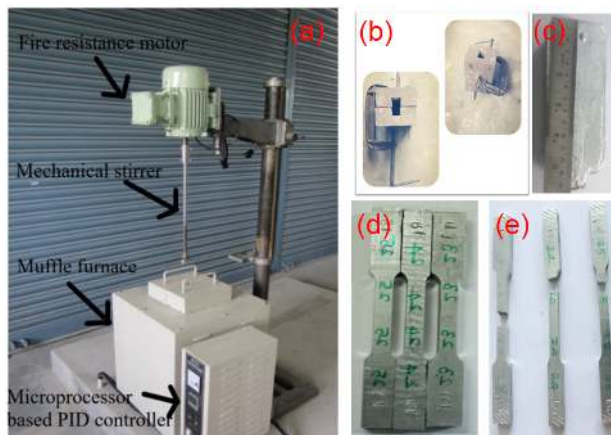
(a) Stir casting setup, (b) Die, (c) Fabricated metal matrix composite, (d) Tensile specimens before testing and (e) Tensile specimens after testing
